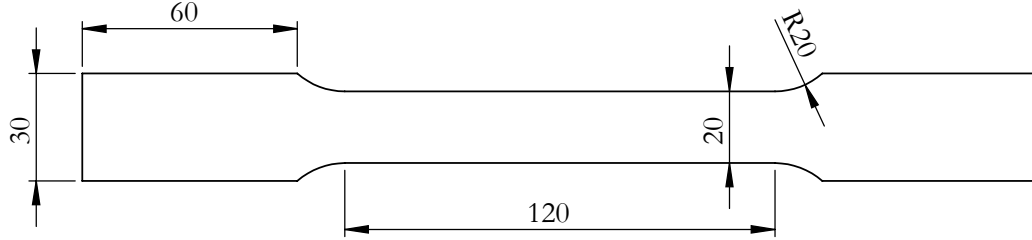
Geometry and dimension parameters of the rigid part instances.
